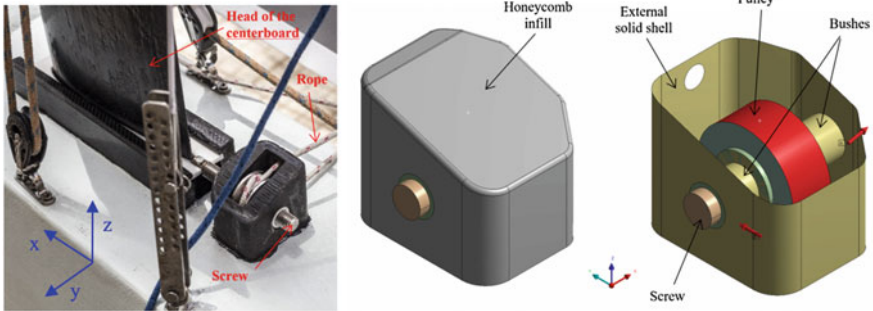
A prototype of the 3D printed support mounted on the deck (left), the assembled CAD model (middle) and a view of the external ABS shell with the pulley, the screw and the bushes (right)
